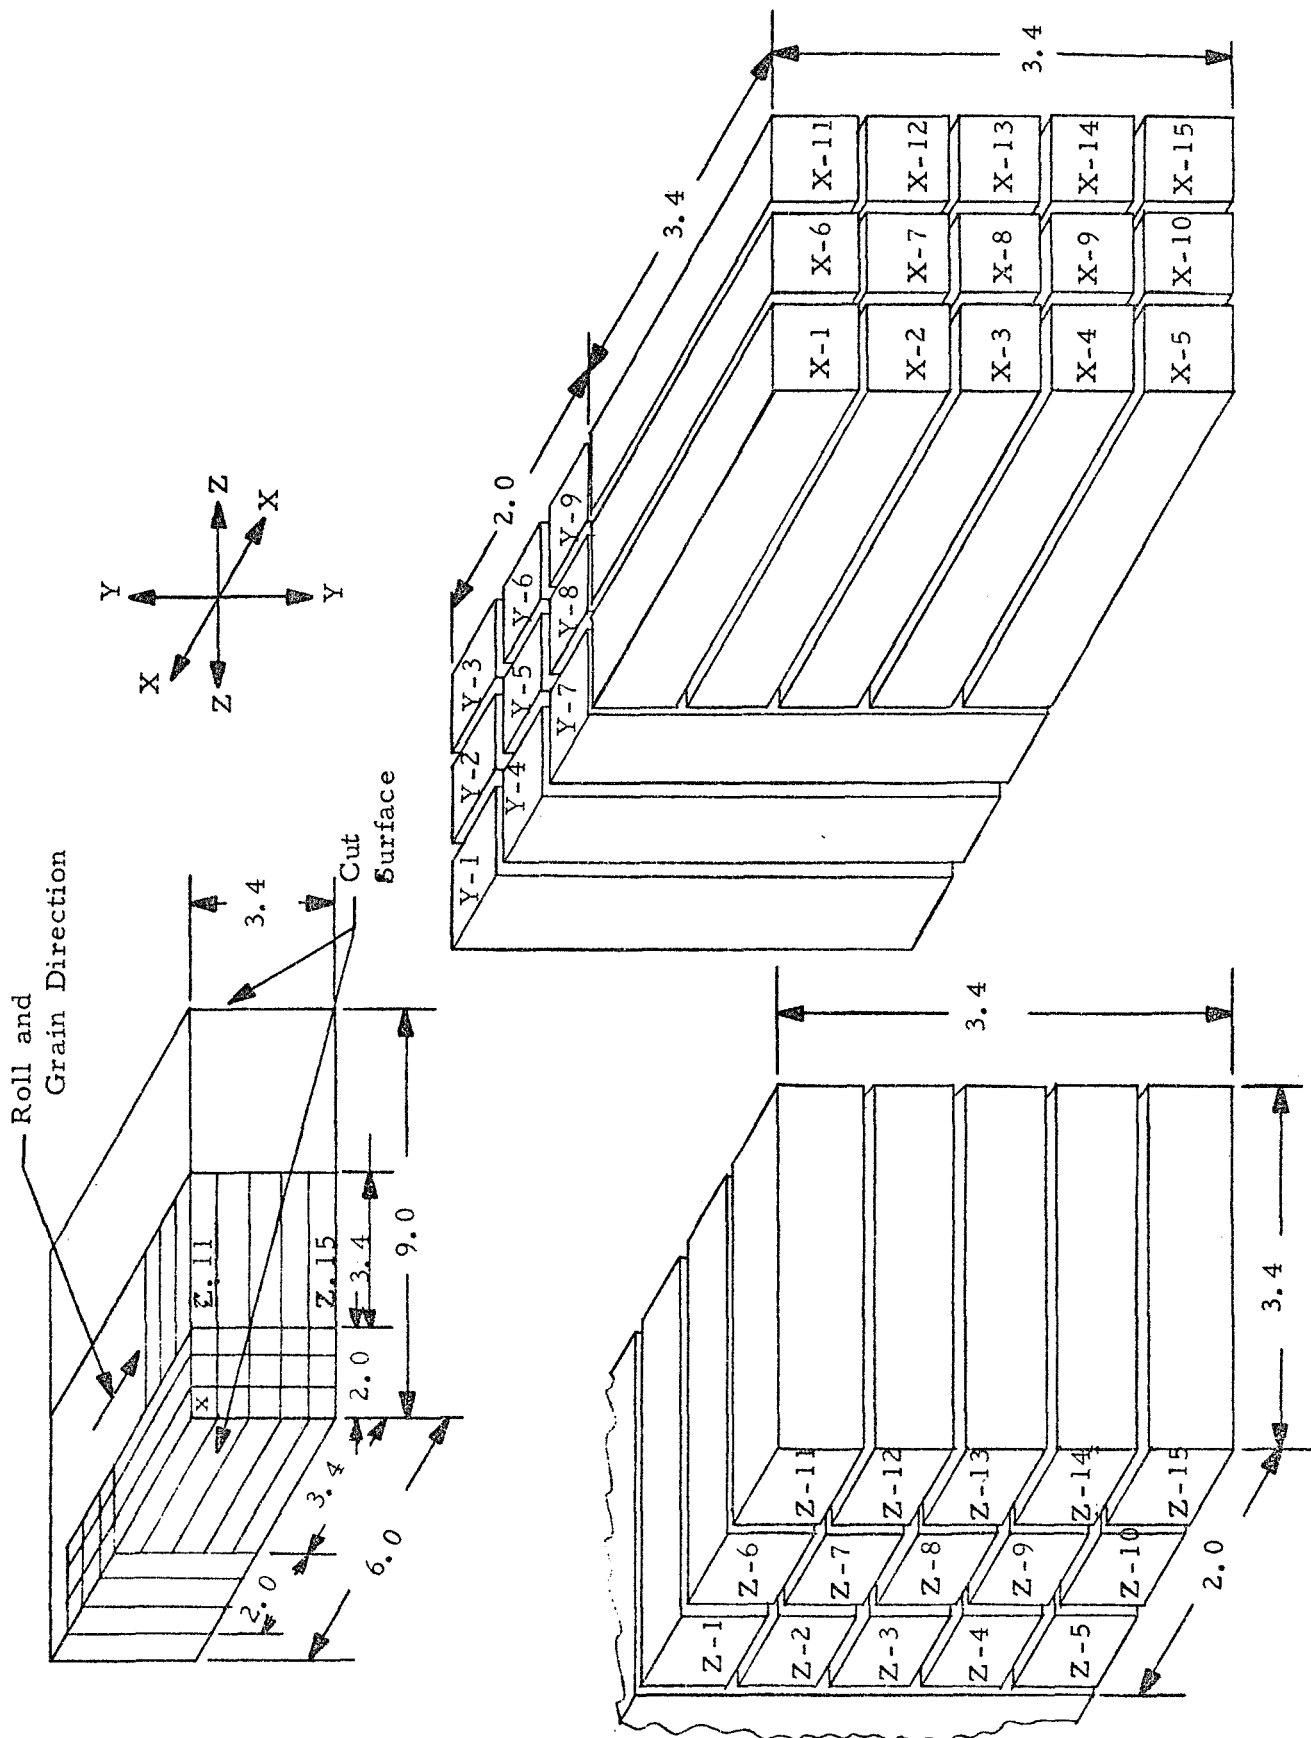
Roll and Grain Directions of A302B Steel Plate for Tensile Specimens.
